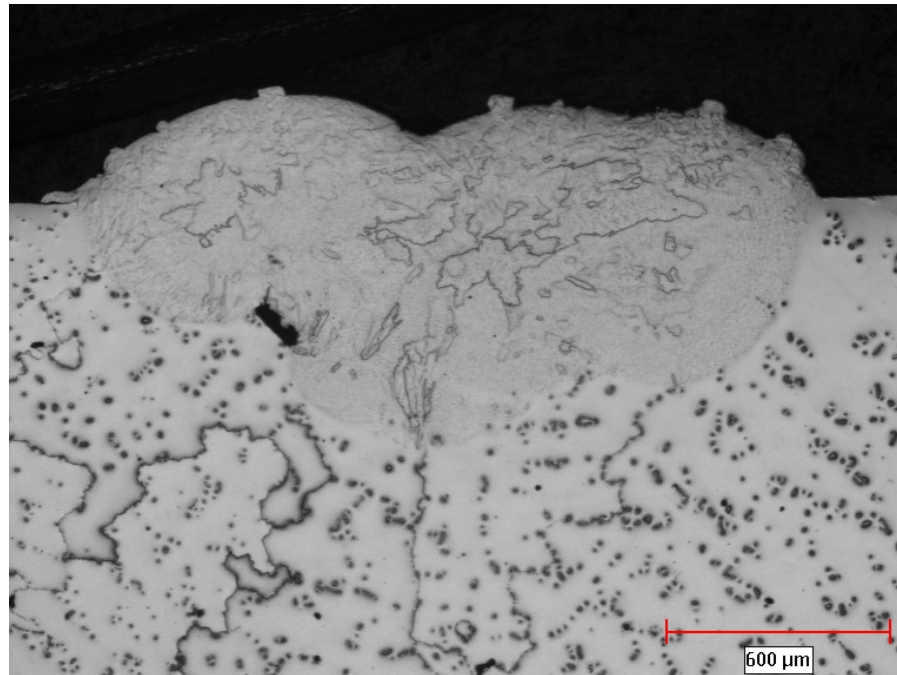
Optical micrograph of the weld fusion zone on the Inconel 738 specimen, as-welded condition
